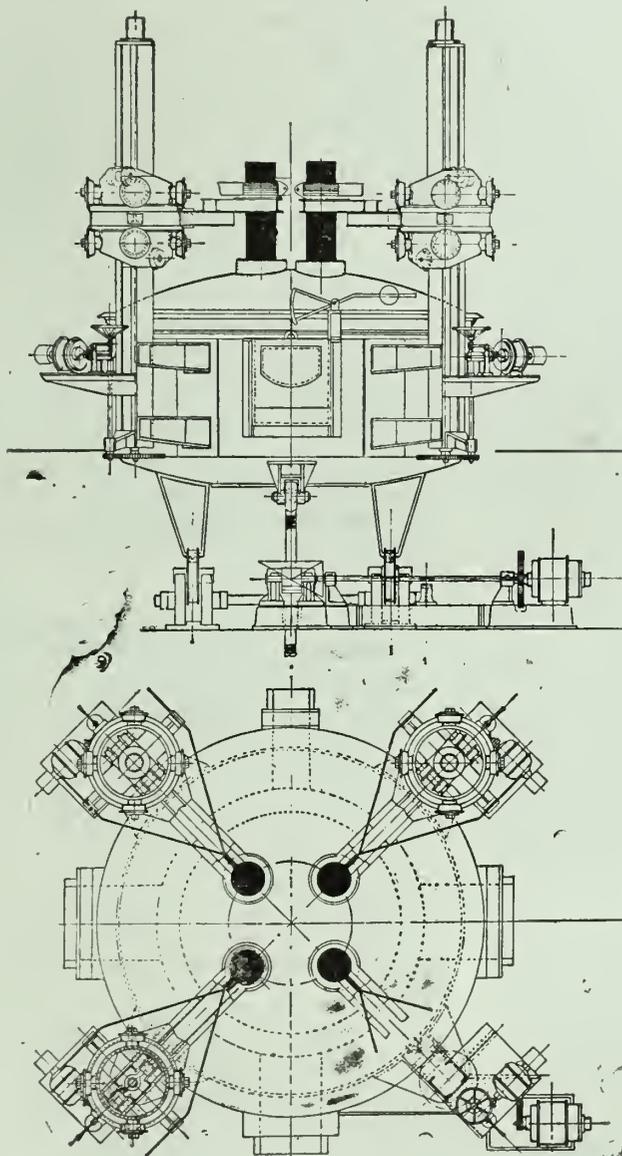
PLAN AND ELEVATION OF 10-TON FURNACE.
